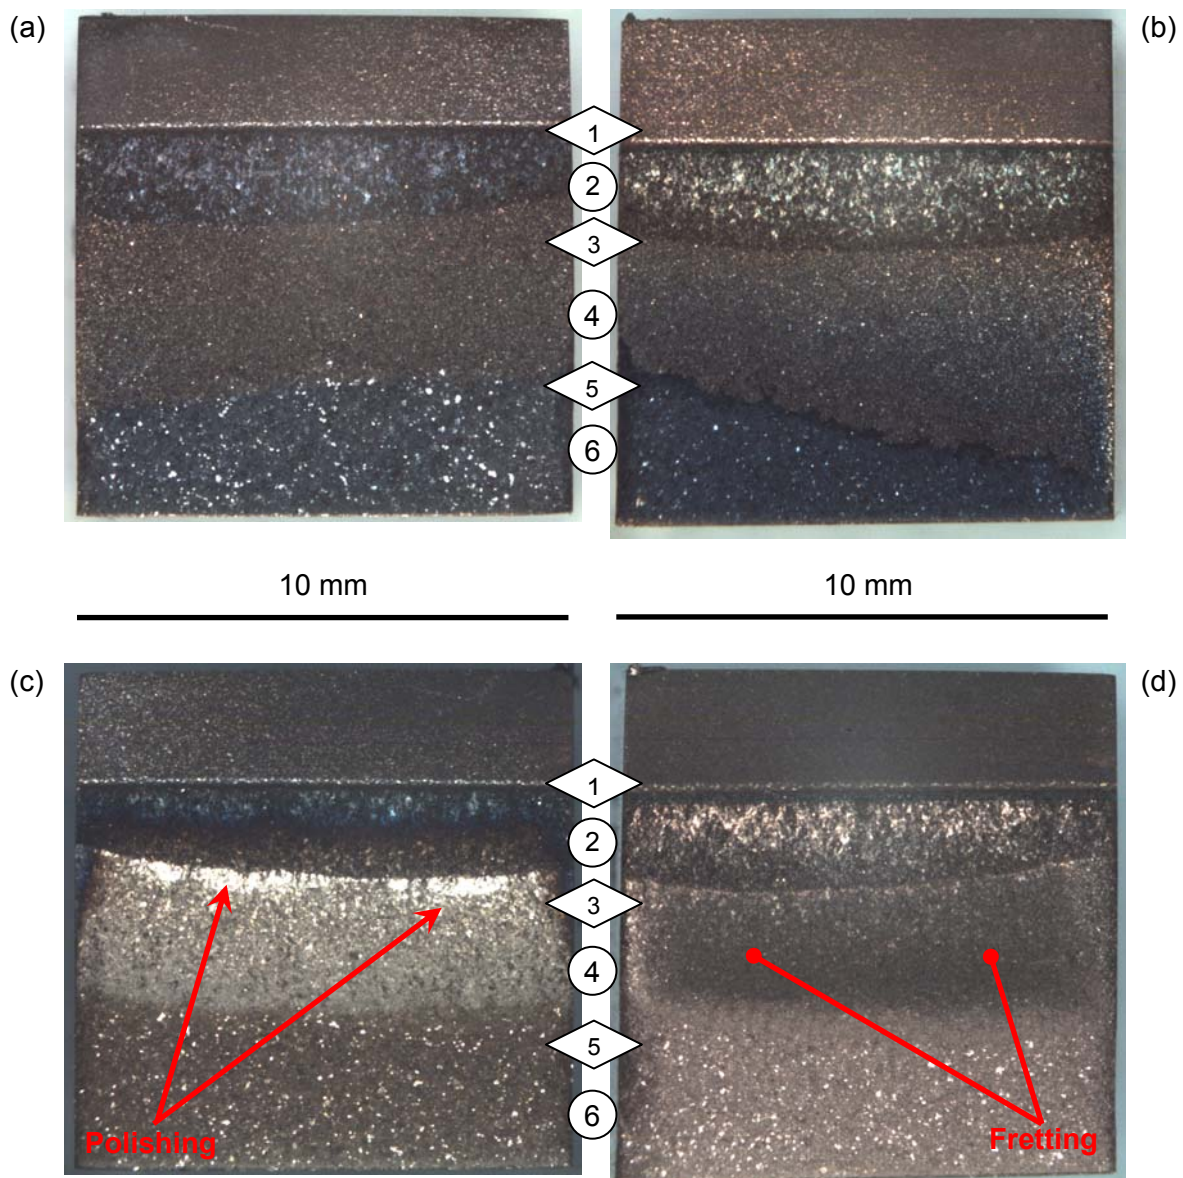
N18 Macroscopic overviews of SENB fracture surfaces, all 1-1-1-1 load cycle:
